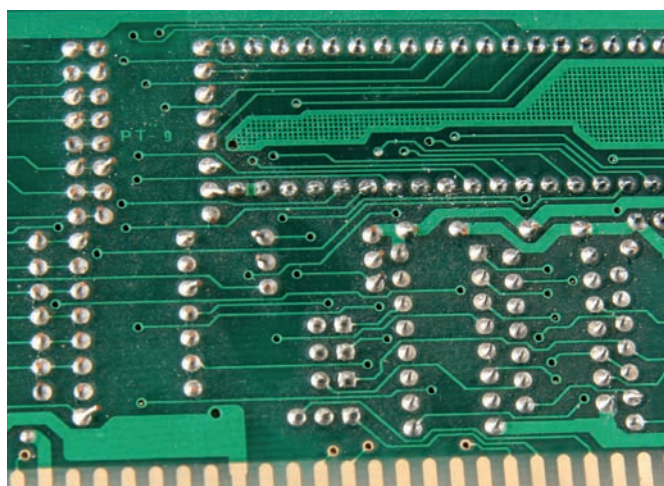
The underside of a double-sided printed circuit board (PCB). The empty holes have metal plating that carries connections through the board. Some double-sided boards require tiny pins and soldered connections on both sides of the board to provide these connections
